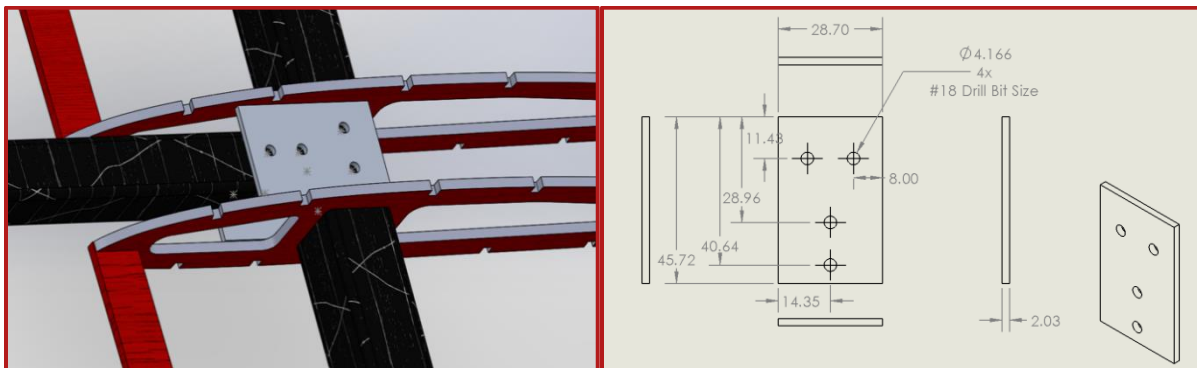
CAD and engineering drawings of Aluminum Bracket
